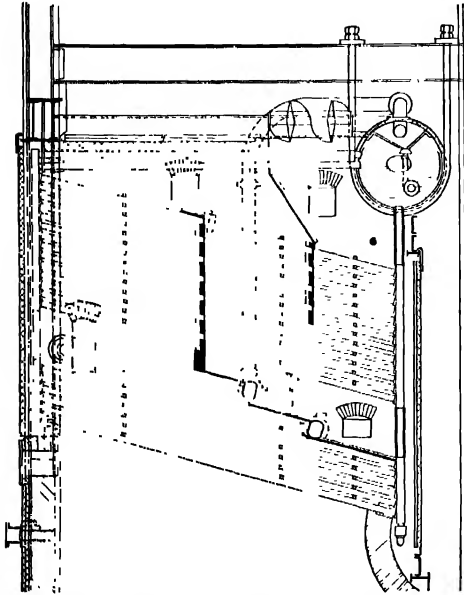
Babcock and Wilcox Superheater — Located Between Tube Sections.
